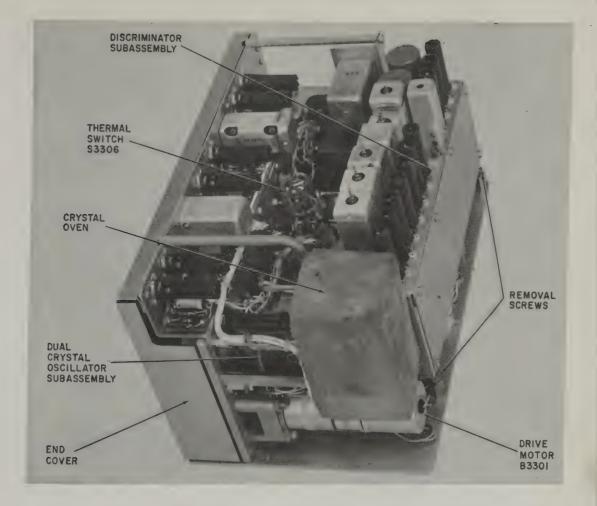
Channelizer Subassembly, Front Oblique View, Completely Assembled
